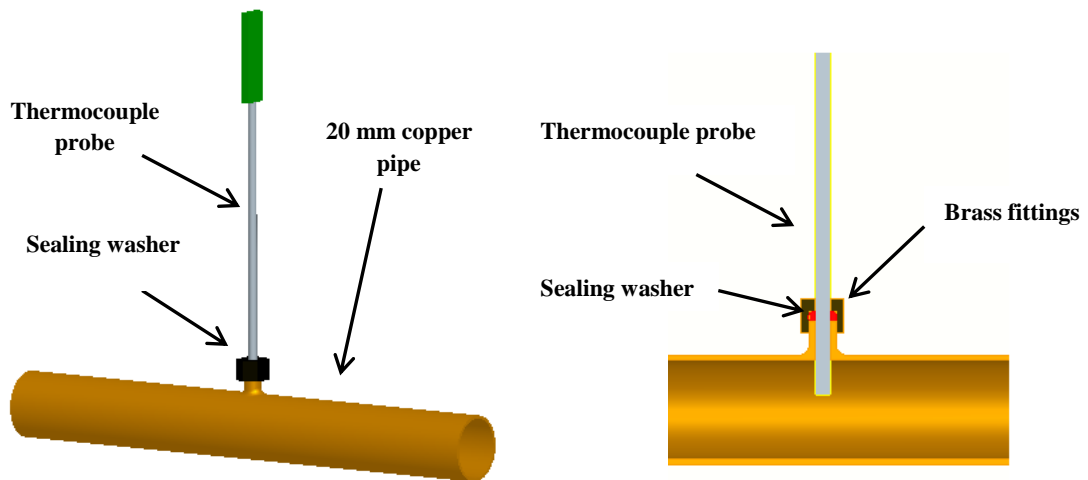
Pro Engineer Wildfire CAD model of the copper pipe mounted K-type thermocouple sub assembly (left) and cross section (right).
